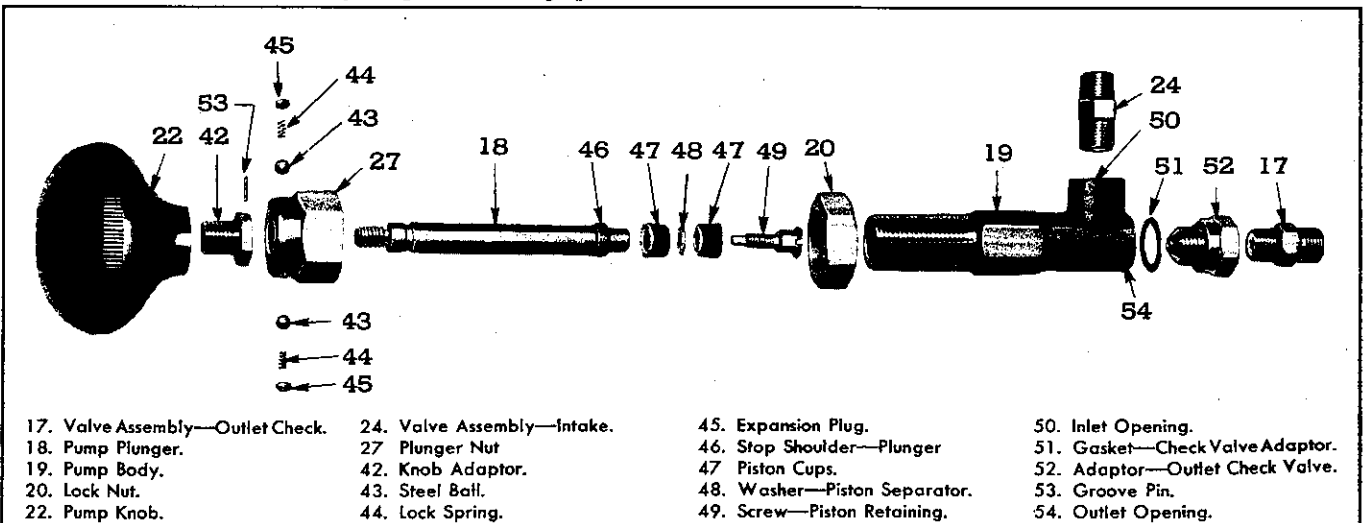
Air Heater Pump Details and Relative Location of Parts.
